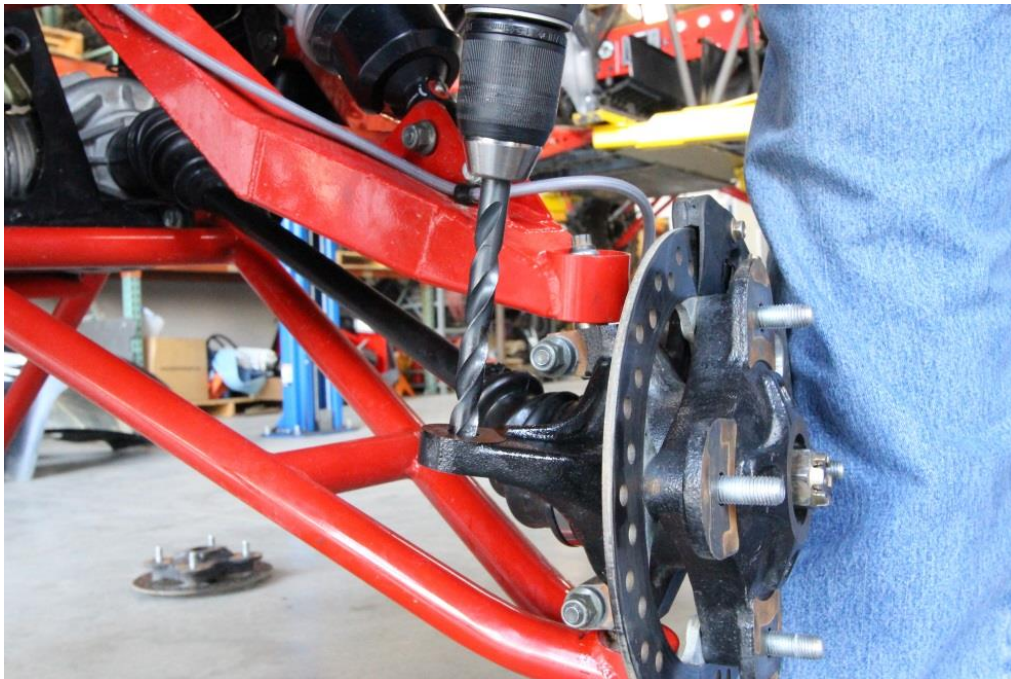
Drill the tie rod hole in the spindle, out to 1/2"
